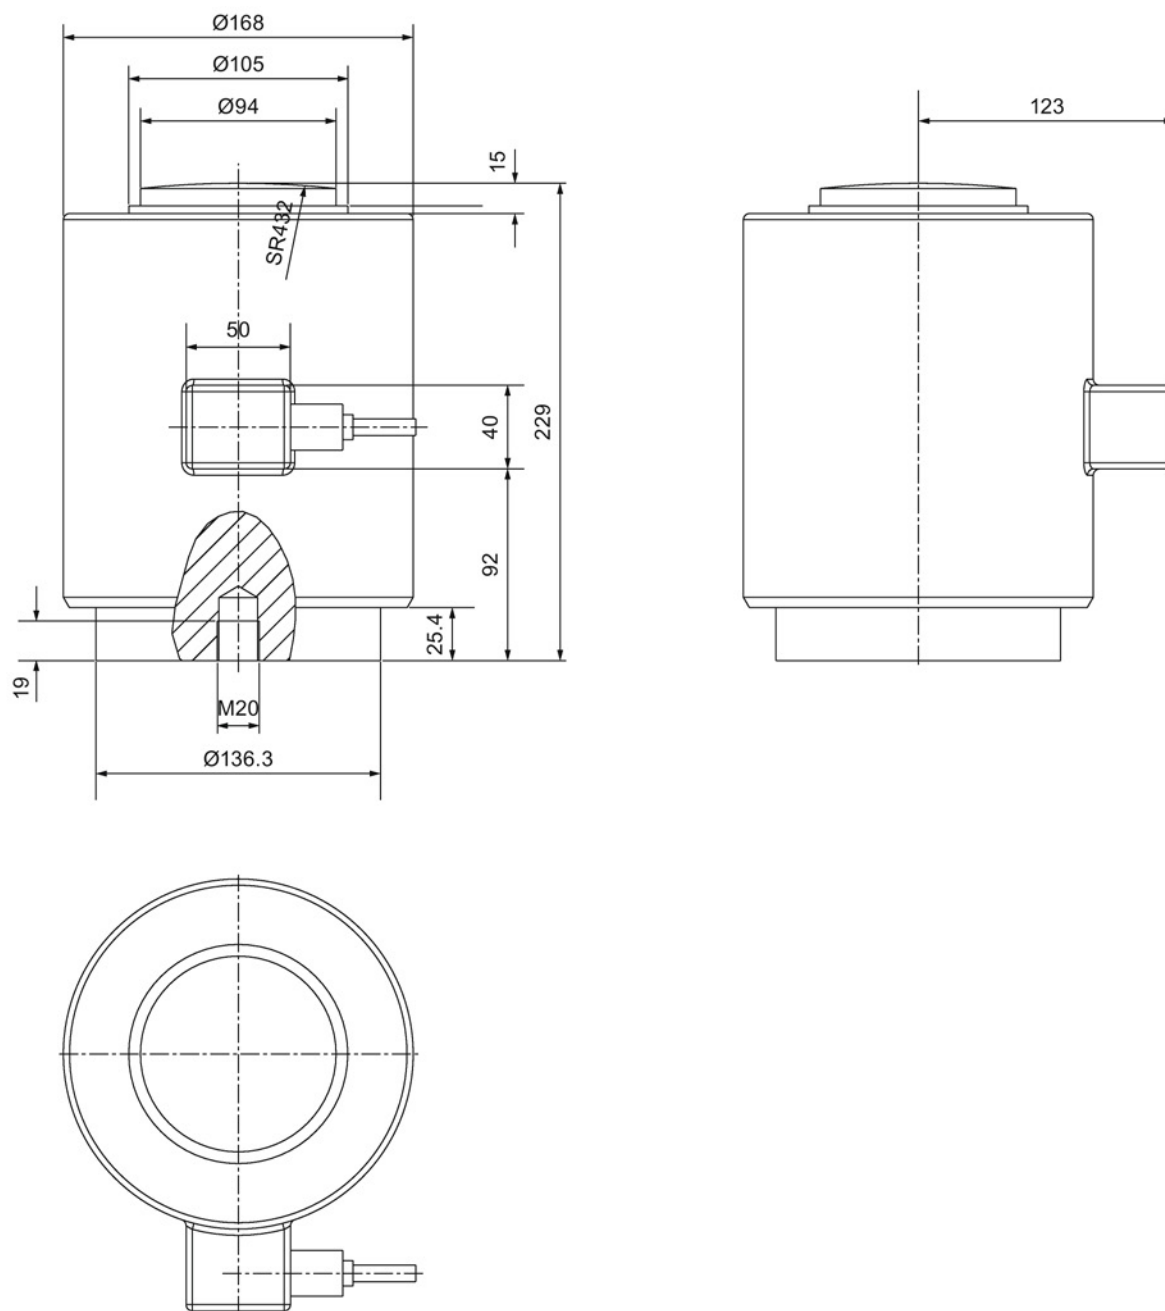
SIWAREX WL270 CP-S SC dimension drawing
